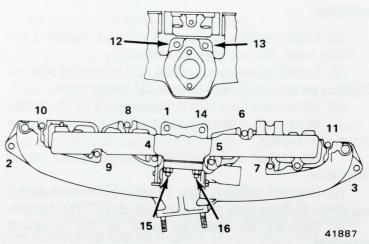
K-8 Six-Cylinder Manifold Torque Sequence
